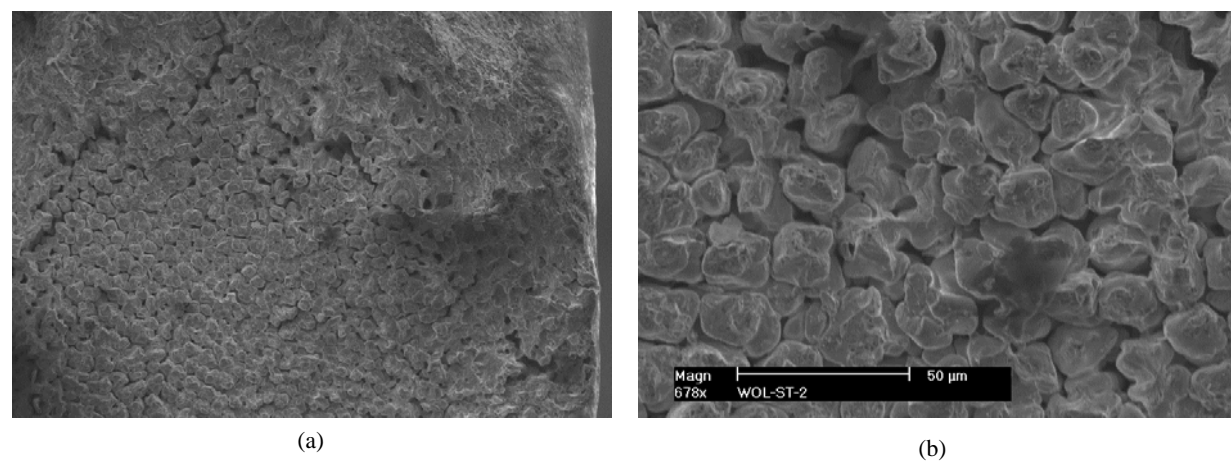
Fracture surface of specimen WOL-ST-2 at location 3 in Fig. 30a. Crack advance is from bottom to top.
